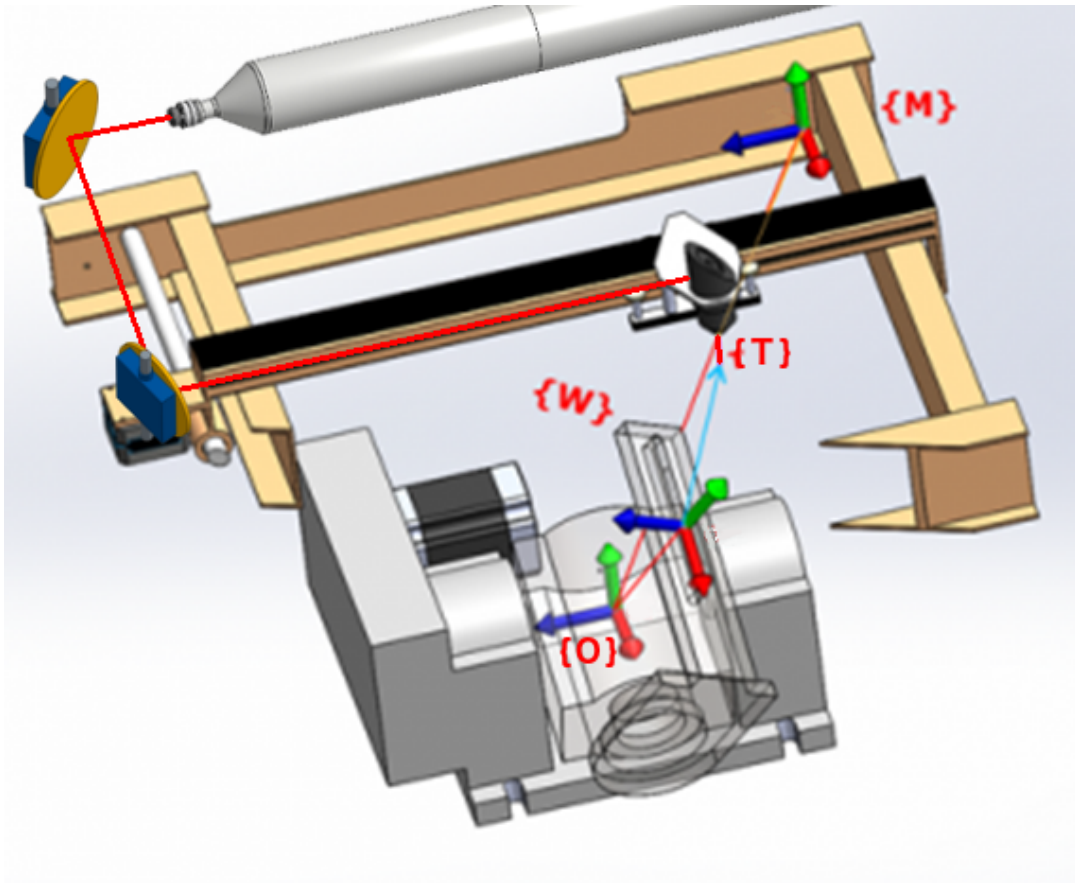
Coordinate systems The definition of coordinate systems. Laser projection onto rotary table using three mirrors. The coordinates frames are machine M , rotary table O , workpiece W , and laser head T .
